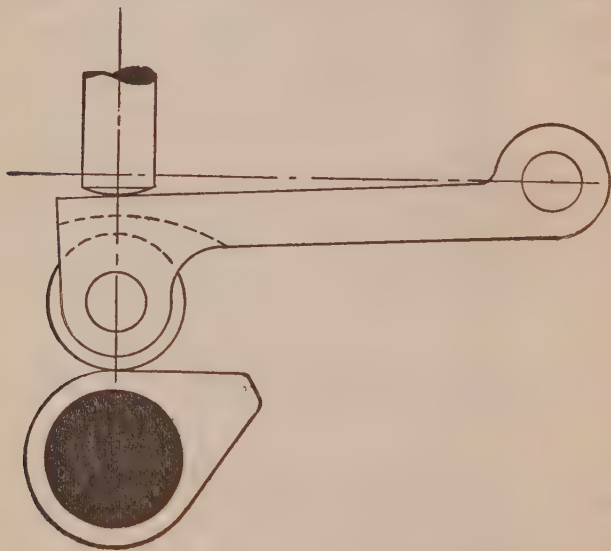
Valve cam device with roller mounted on carrier. This design is frequently used to reduce the side thrust upon the push rod.
